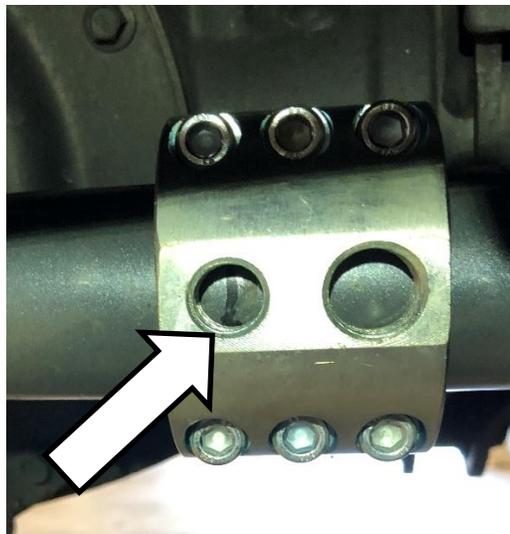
Driver Side Stabilizer Clamp Installed on the Tie Rod with 1/2" Mounting Hole Over the Mark Left from Step 9.
